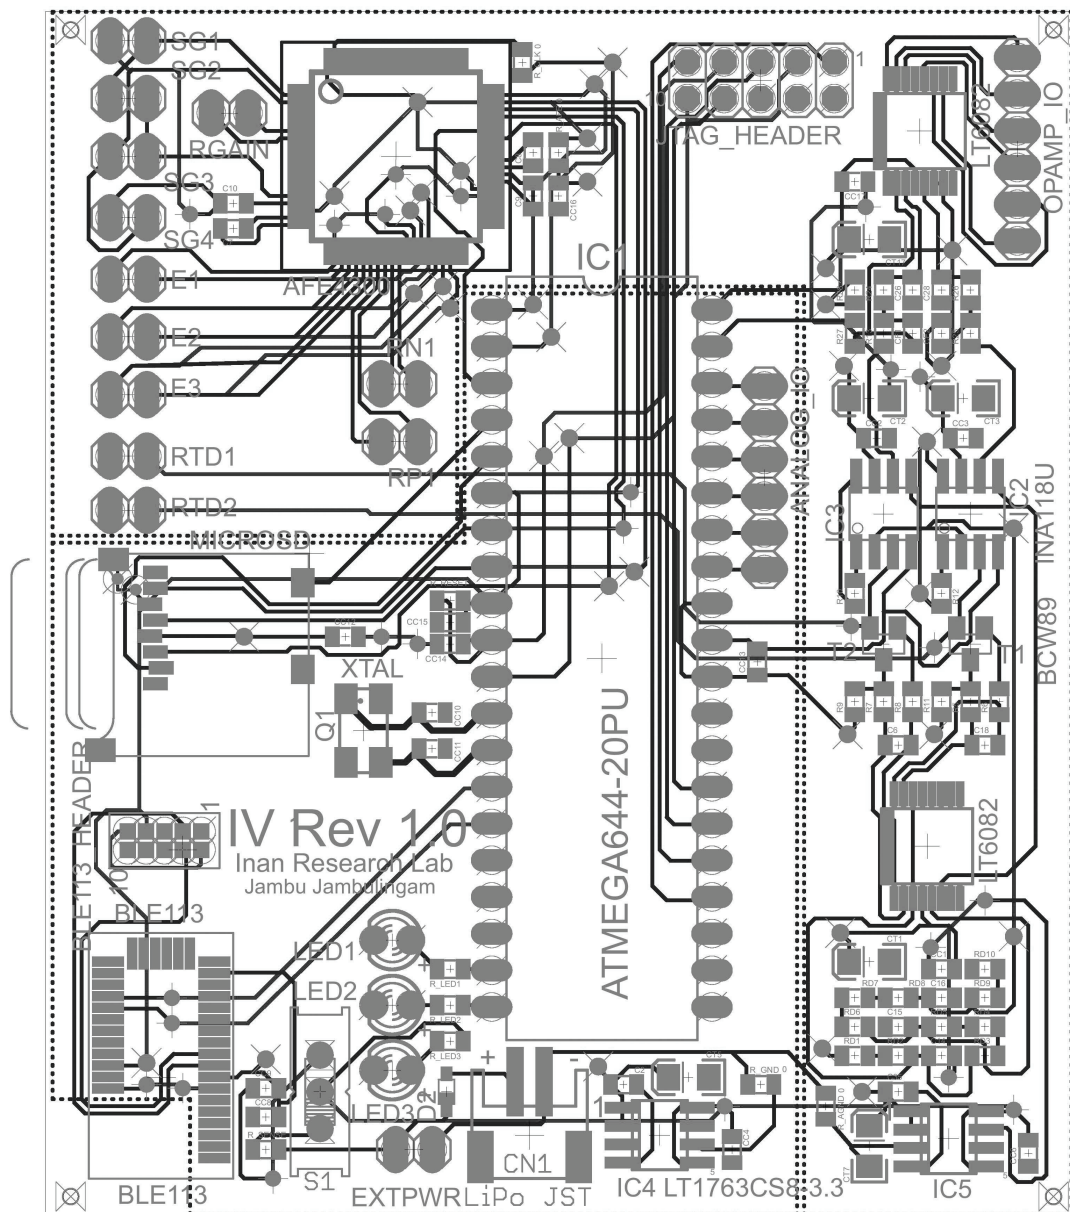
Layout for IV Rev 1 Printed Circuit Board, made with EAGLE V7.2.0
